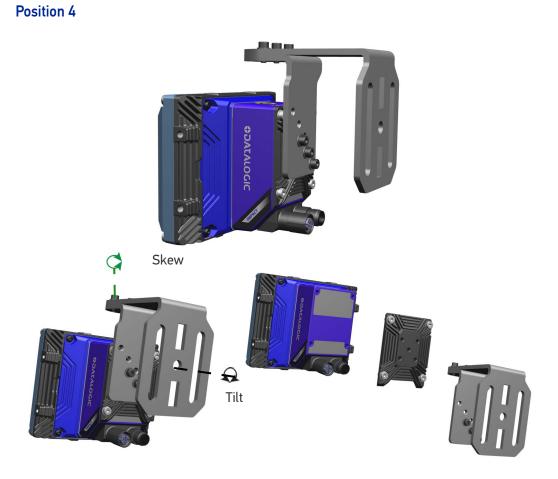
36 LEDs Illuminator, front extended positioning with Pivot Fix Bracket (illuminator horizontally mounted)
